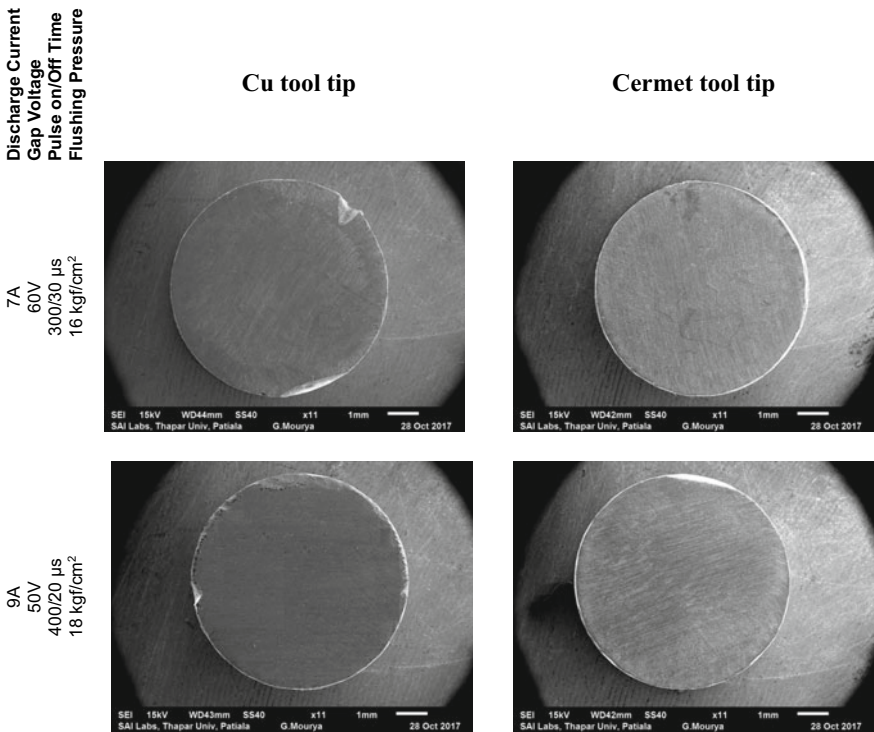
Morphology of cermet and Cu tooltips at various process parameters of machining
